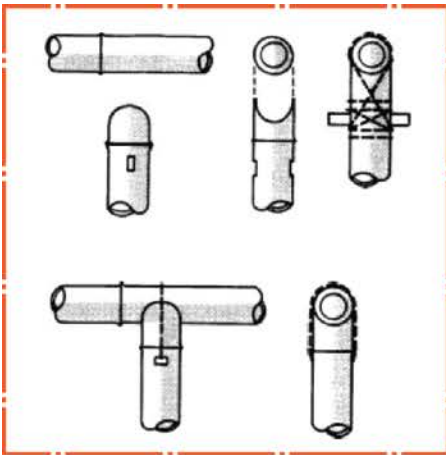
Various saddle (butt) joints, double butt joints, insert joint and crossover joints
